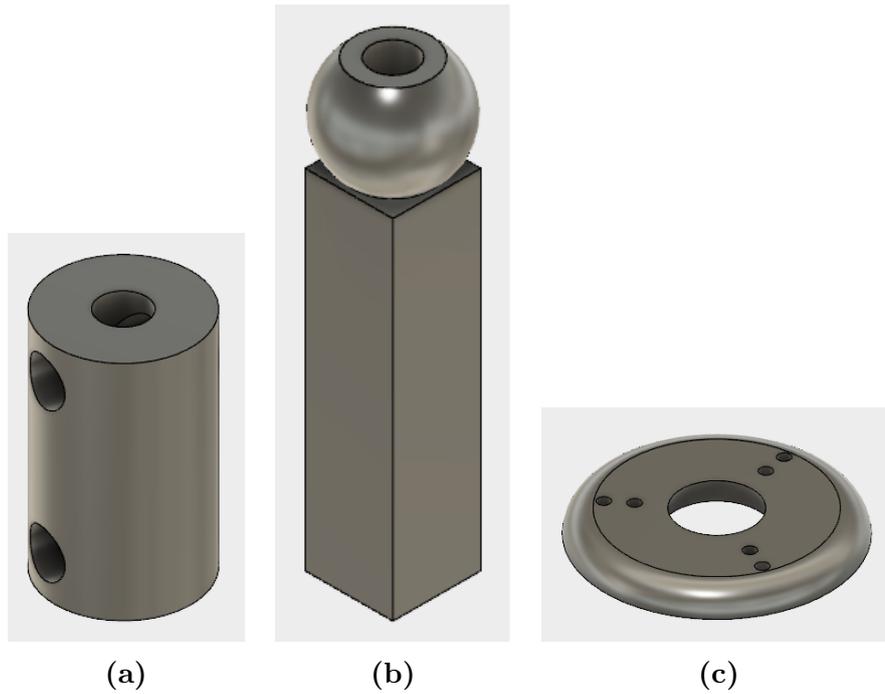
Gripper pieces: (a) Junction that connects the actuator and the threaded shaft; (b) "BallCube" which is around the threaded shaft; (c) Dish that is attached on the ball which is on top of the "BallCube".
